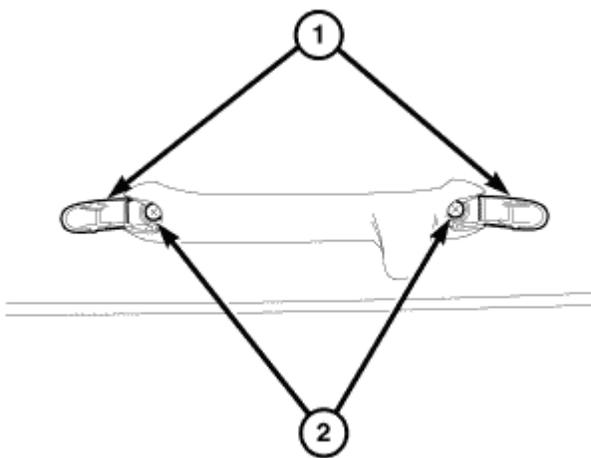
Load Floor Panel, Load Floor & Rear Seat Bracket
